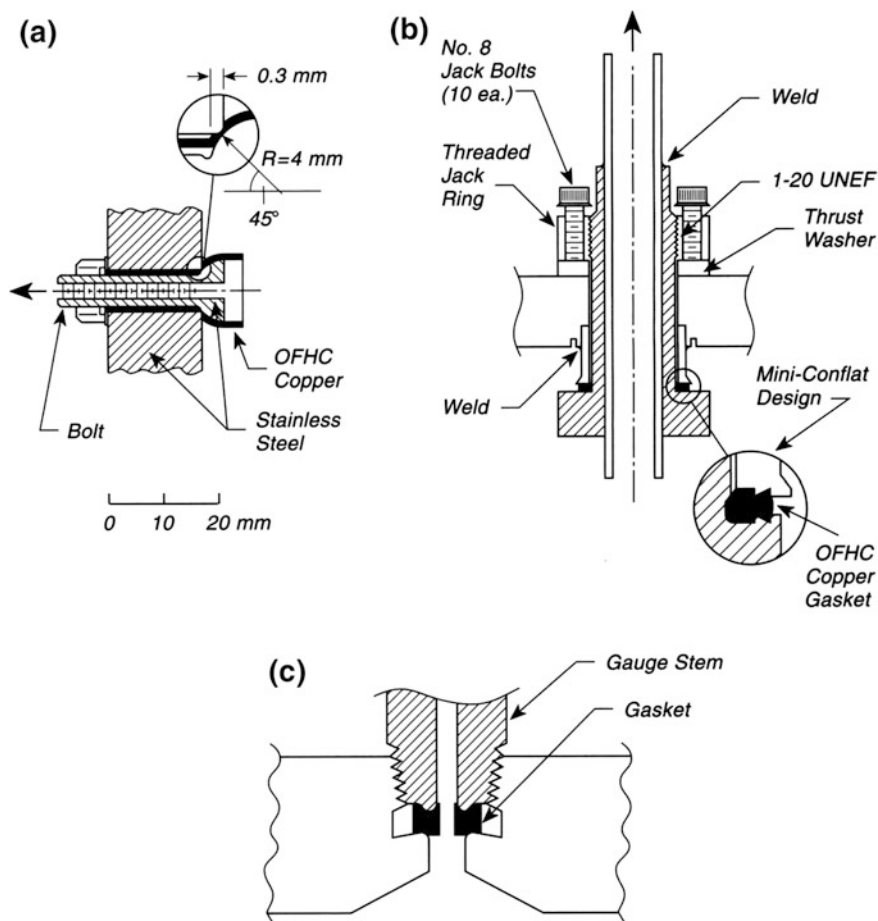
Unconventional compression seals. a Hollow bolt seal. b Mini-Conflat seal. c Gauge tube seal
